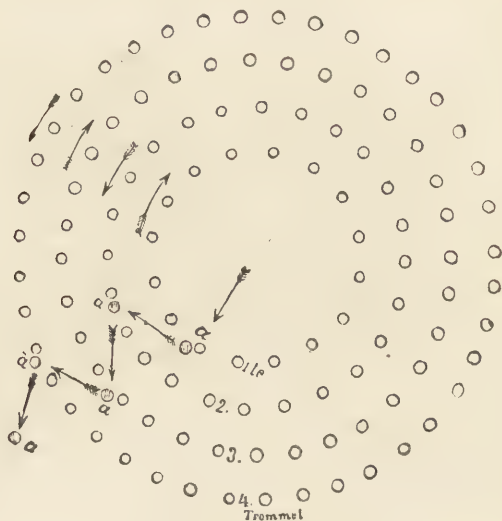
Arrangement of the rods in a disintegrator (Trommel=drum).
